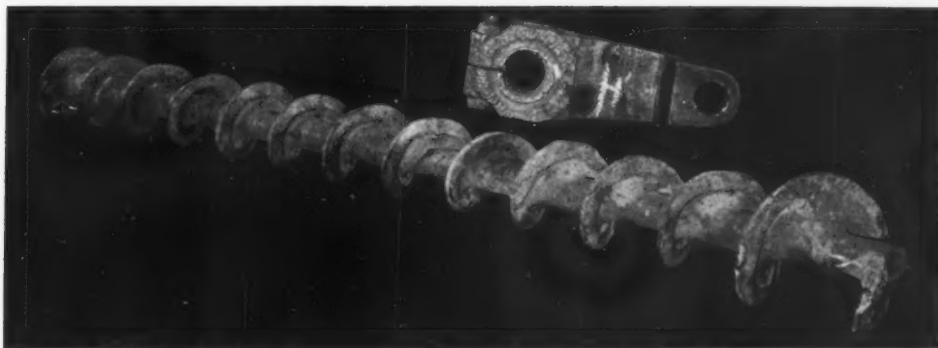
Machine parts which contact abrasive materials, such as this conveyor screw, or parts for use in locations where grit is present should be hard-faced
